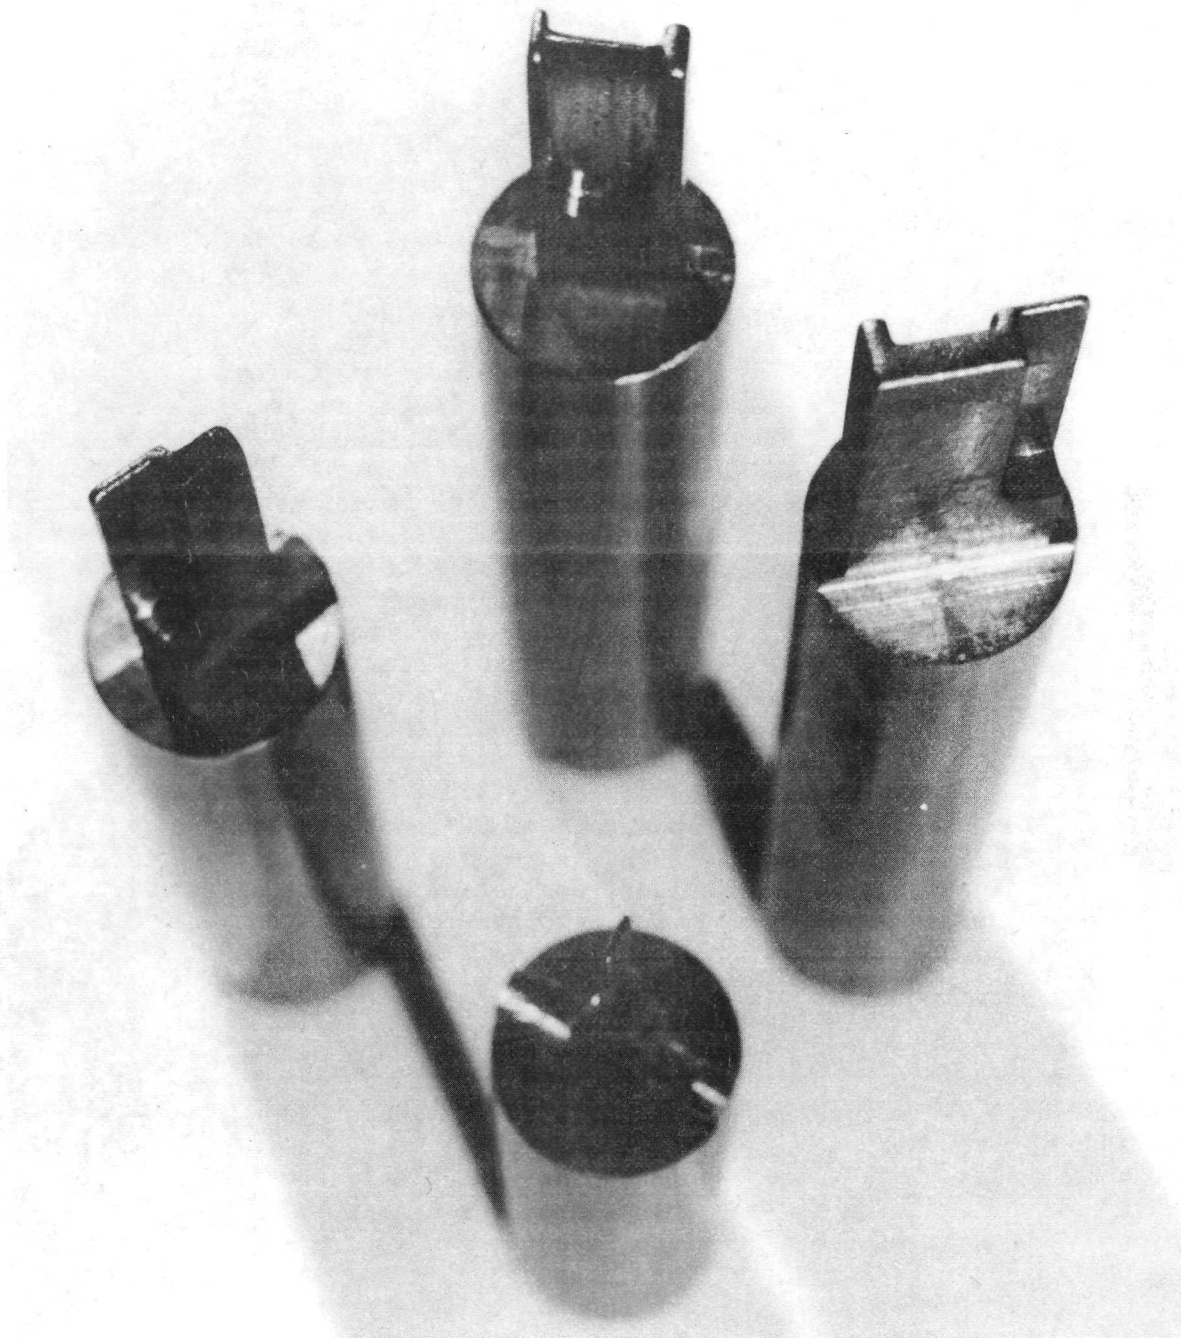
Electrical Discharge Machining Tools for Double Probe Design
